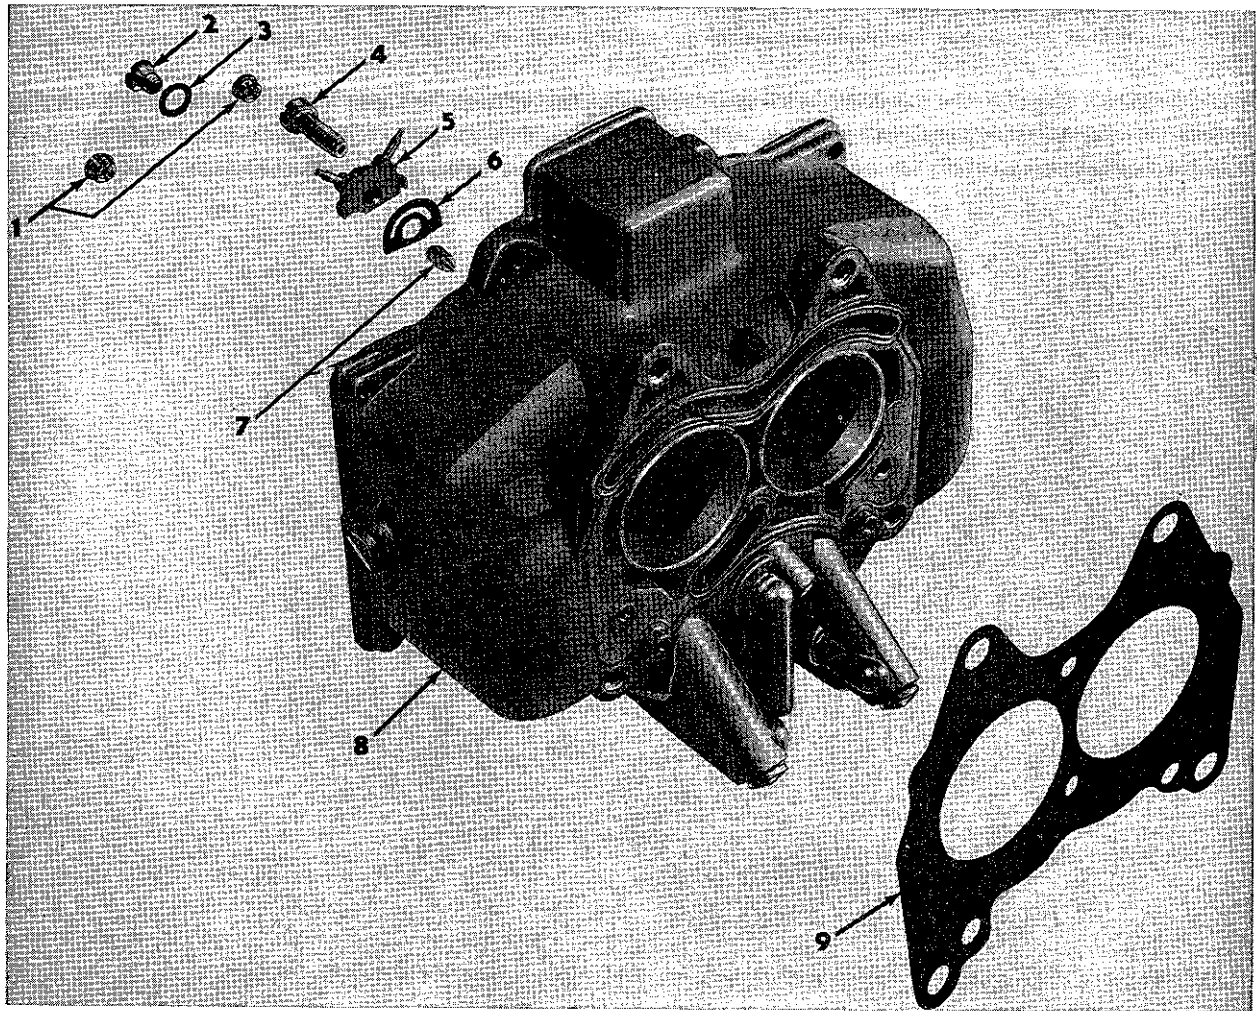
2204S CARBURETOR BOWL AND ATTACHING PARTS
